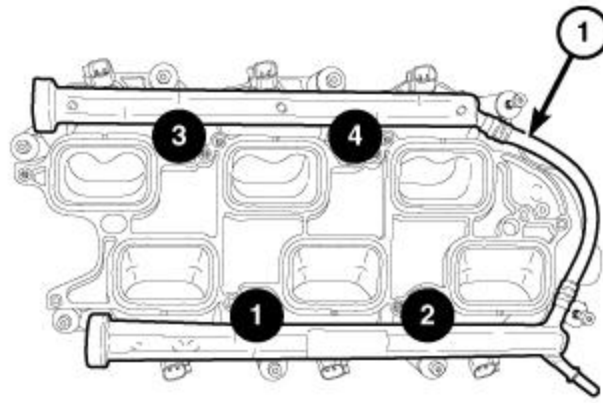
Lower Intake Manifold To Cylinder Head Seals
